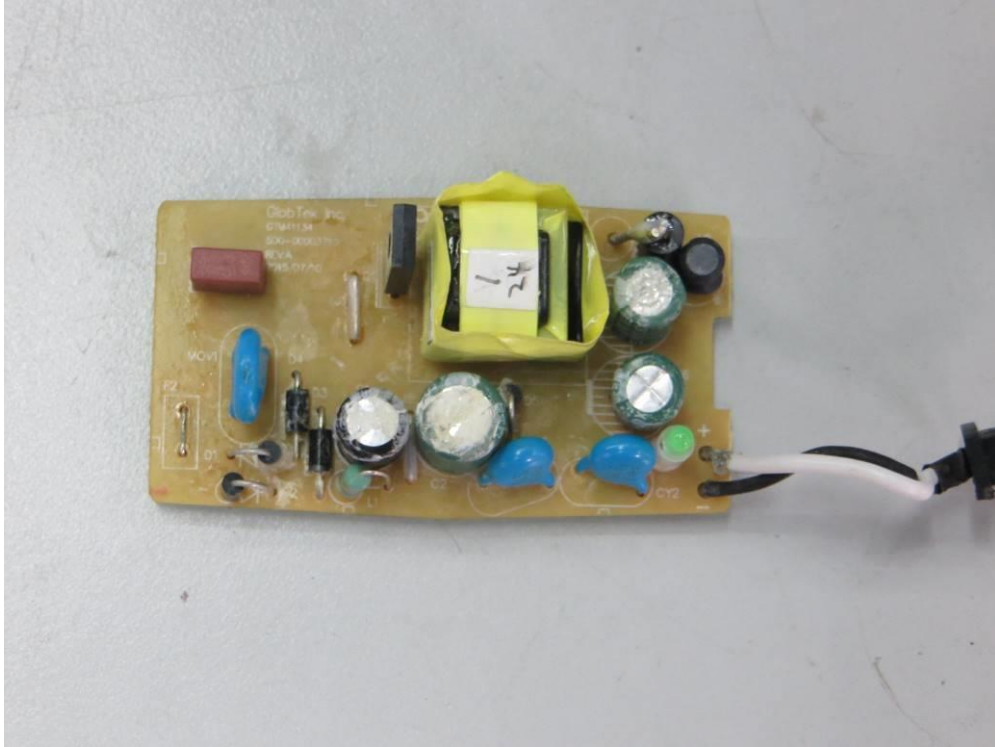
PCB view for the structure type only use F1 and a LED indicator (optional)
